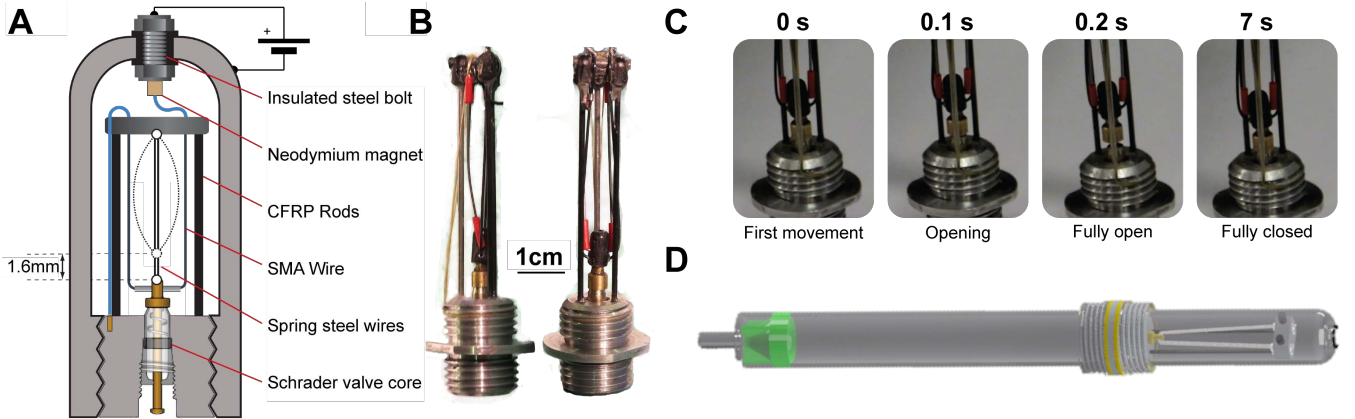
(A) Schematic of valve opening mechanism, with the vessel body forming a negative earth. (B) Fabricated valve actuator. (C) Valve actuation times under a 5A, 0.5s current pulse. (D) Transparent CAD rendering of the fabricated jet, showing removeable plastic nozzle and valve actuation system.
